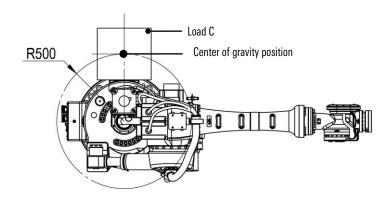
Installation dimension of shoulder equipment of AIR165-2750A manipulator
